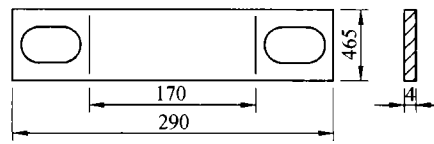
Tensile stress measurement specimen dimensions (unit: mm).
